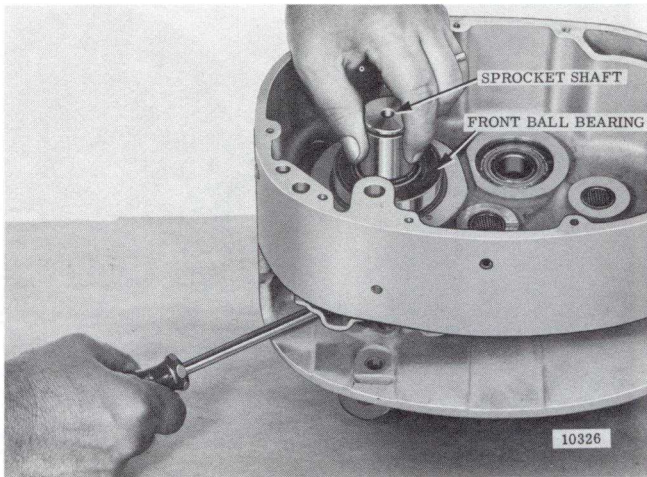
Removing Sprocket Shaft and Front Bearing
